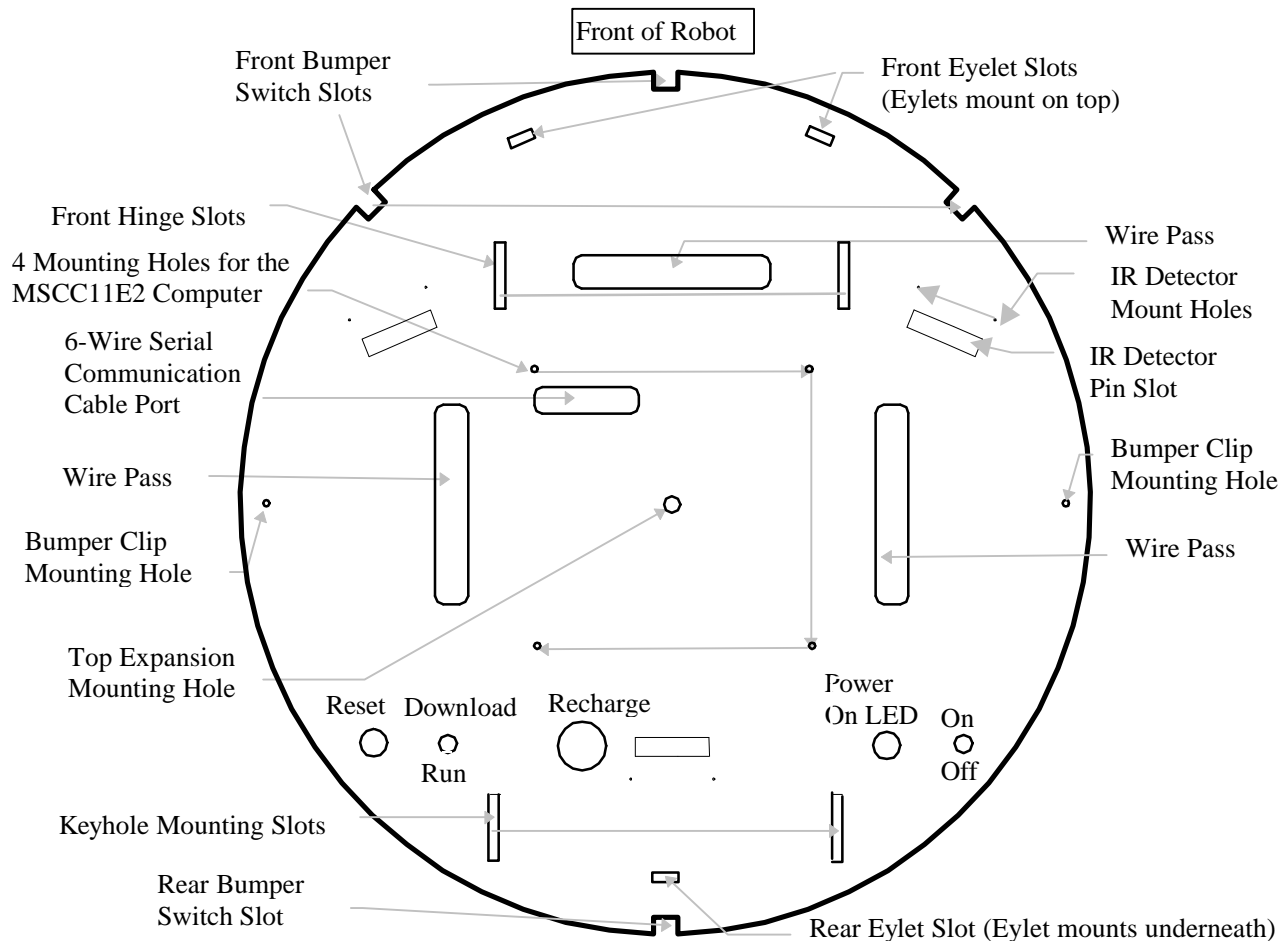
Layout of TJ-PRO™'s Top Plate. Wire pass slots may have different shaped cuts than shown.
